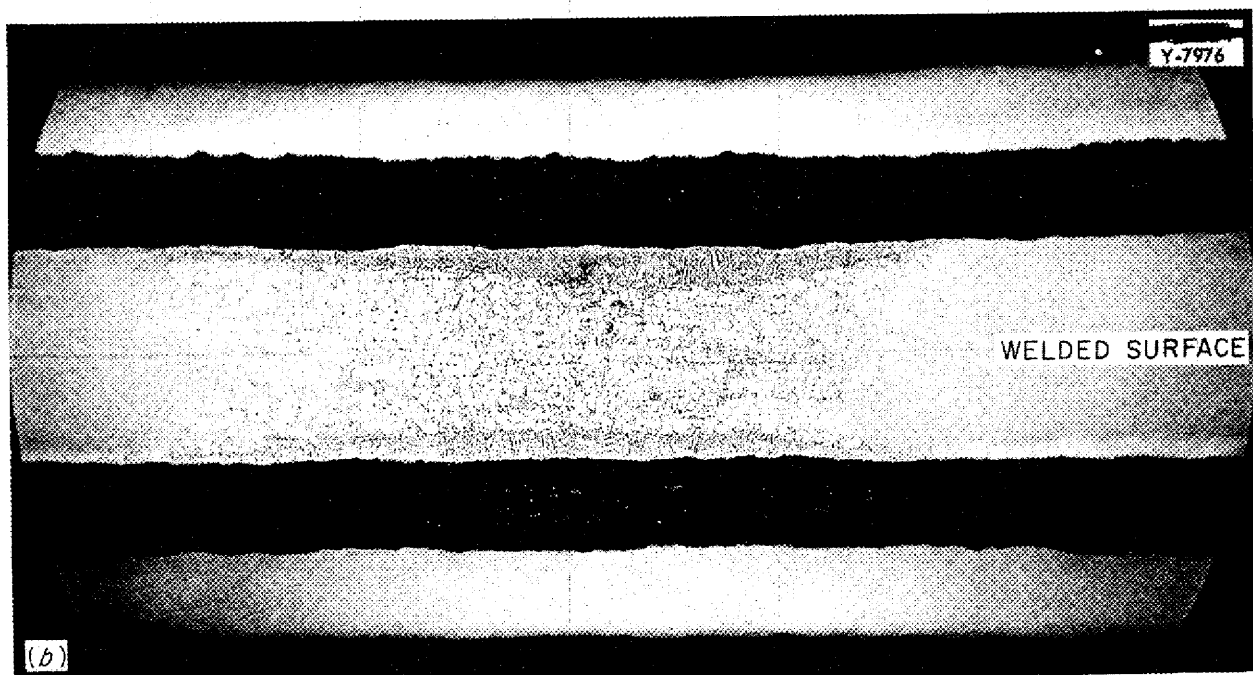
Spot Welds of Stainless-Steel-Clad Fuel Elements. (a) Welding current 6300 amp, excellent penetration. (b) Welding current 5800 amp, marginal penetration. Etched with aqua regia. 50X.
